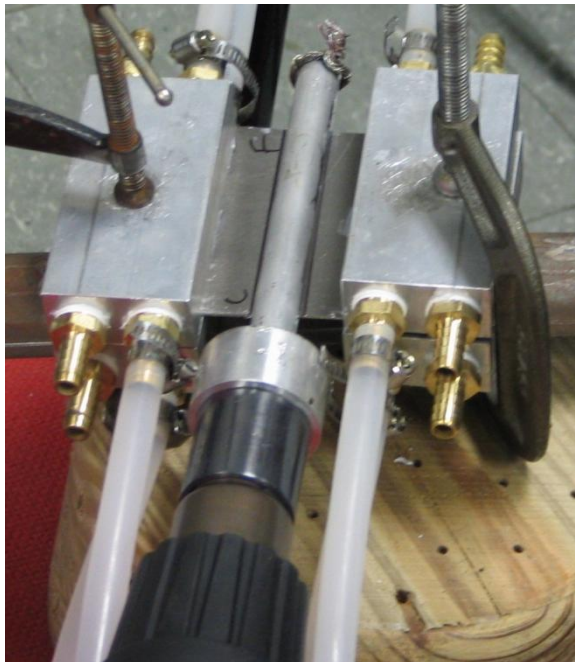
Steinel[®] hot air gun used to linearly heat Mg AZ31B bulge specimen
